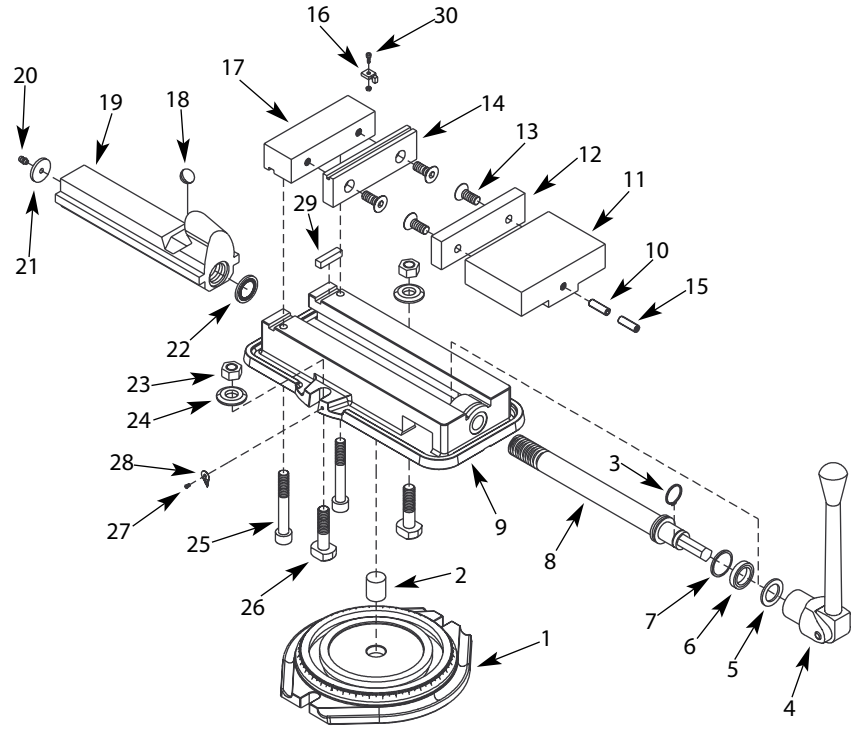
Replacement Parts Illustration for 6" Precision Milling Vise
